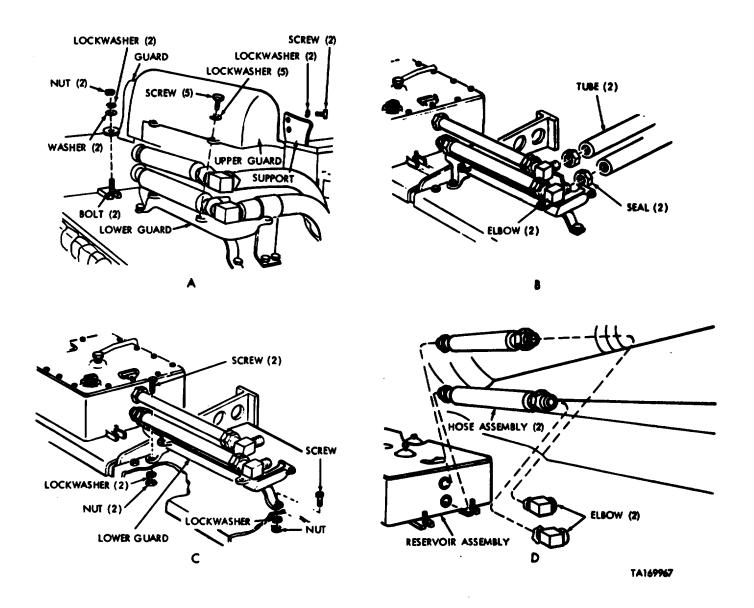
Removal or installation of rear tube assemblies (sheet 1 of 3).
